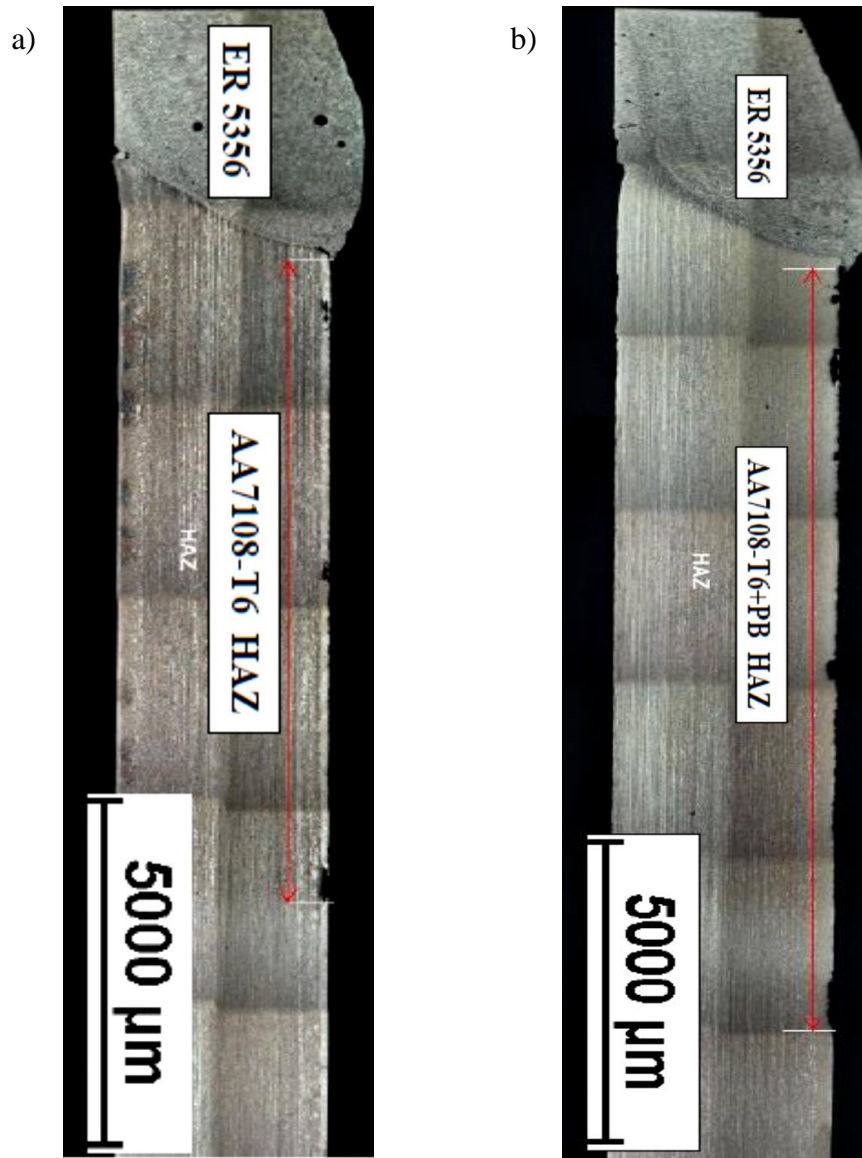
Large area scans of lap-joint welded configuration C (ER5356/AA7108/L) in the (a) as-welded T6 condition and (b) as-welded T6+PB condition post exposure to ASTM G85-A2.
